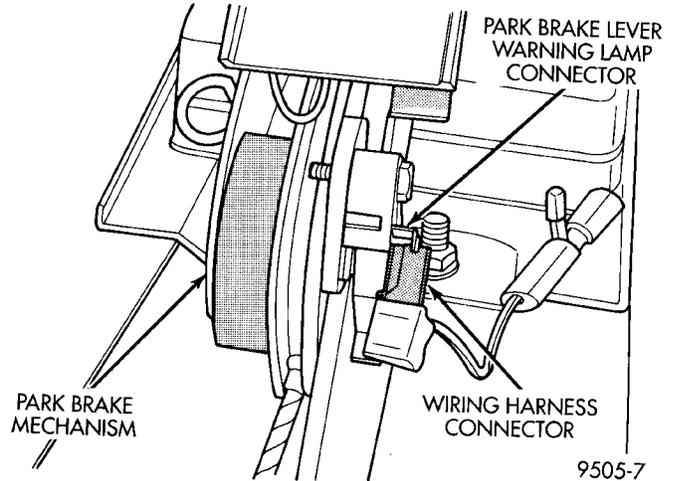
Brake Warning Lamp Connection To Park Brake Lever
